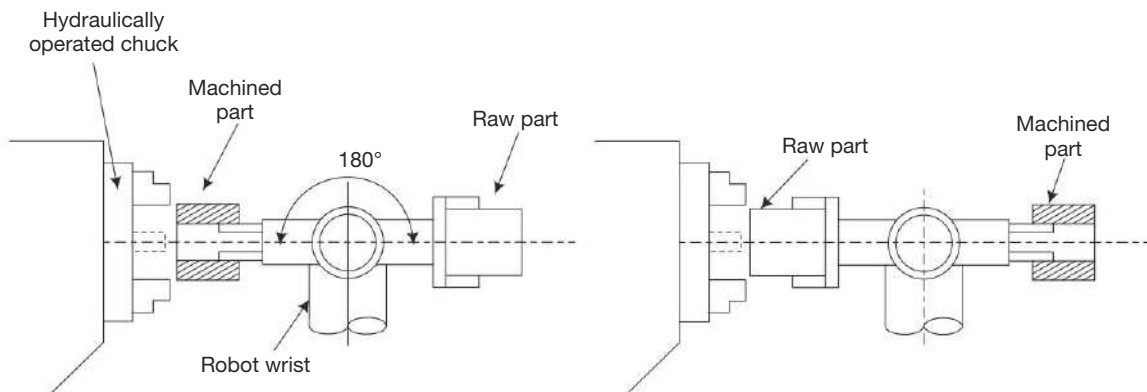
Dual gripper in operation with a machine-tool loading
